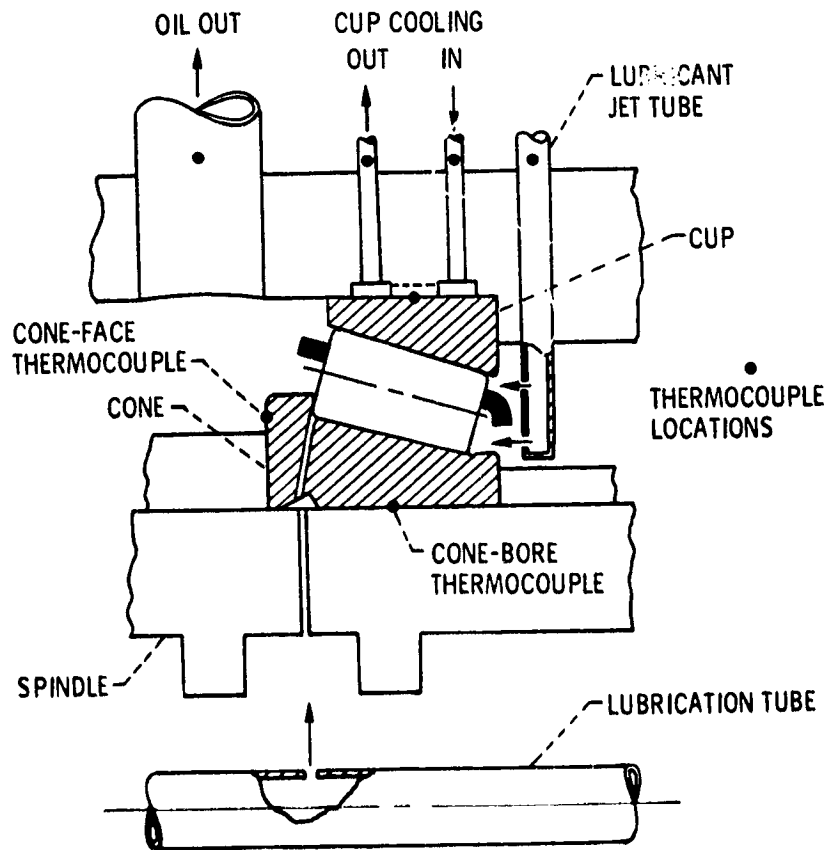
Tapered-roller bearing with cone-rib and jet lubrication.
